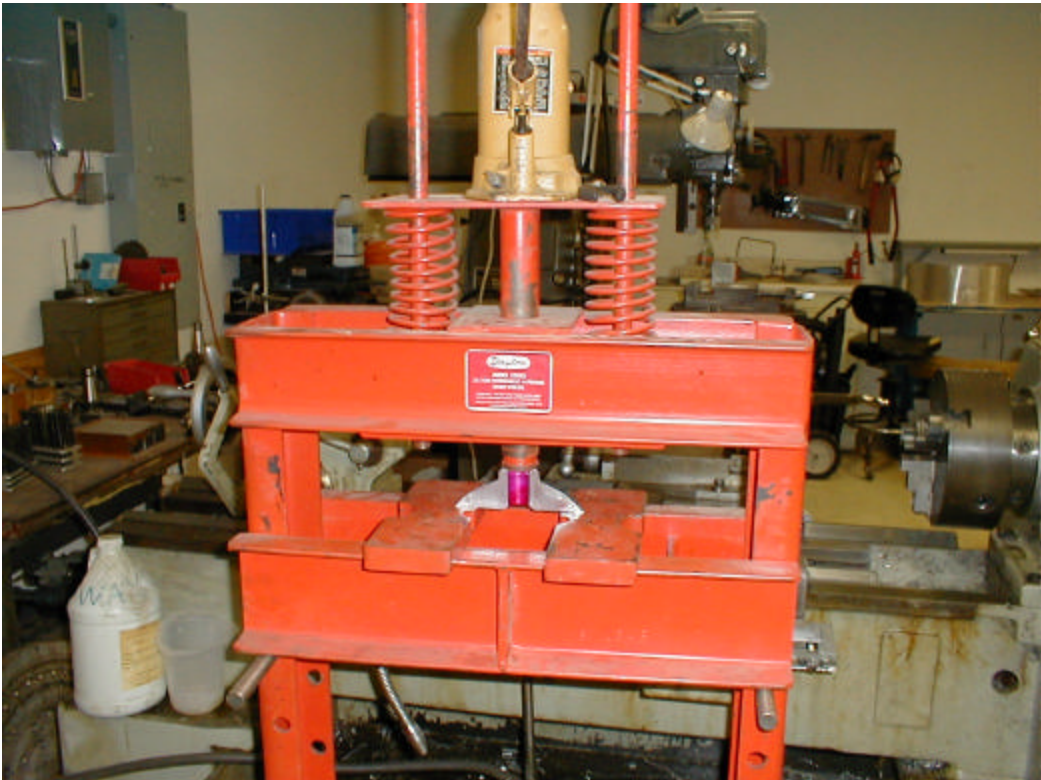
The Apparatus used to Break Open the Cracks in a Cylinder Head
